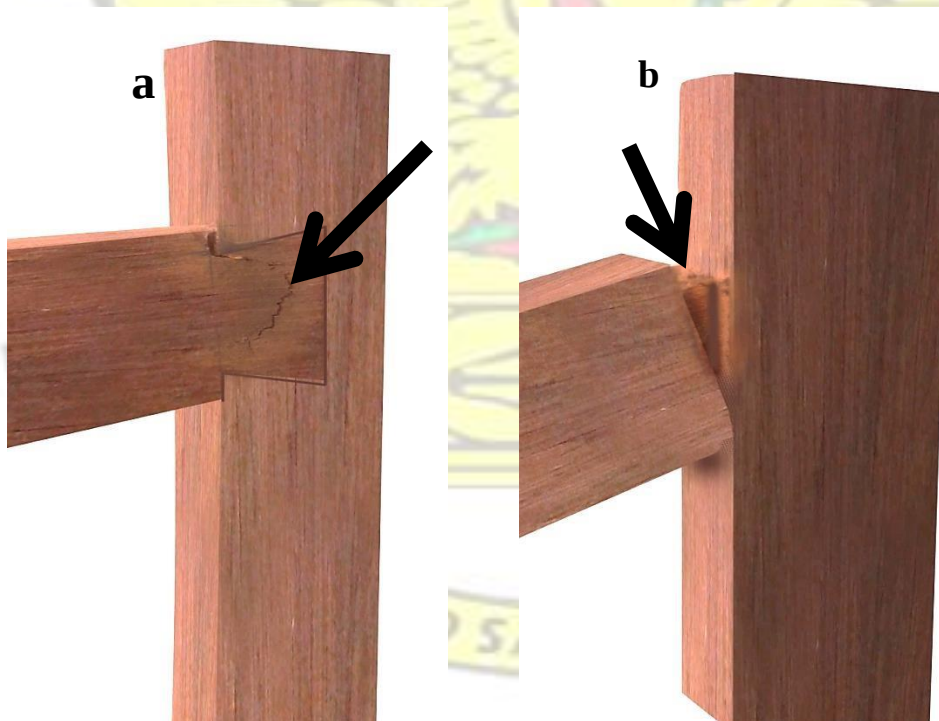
Failure (arrowed) of dovetail (a) and mortise-tenon (b) joints.
